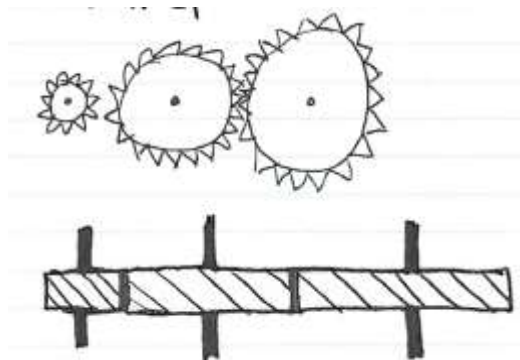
This illustration shows the top and front view of Concept 2, which show a gear reduction using spur gears.
